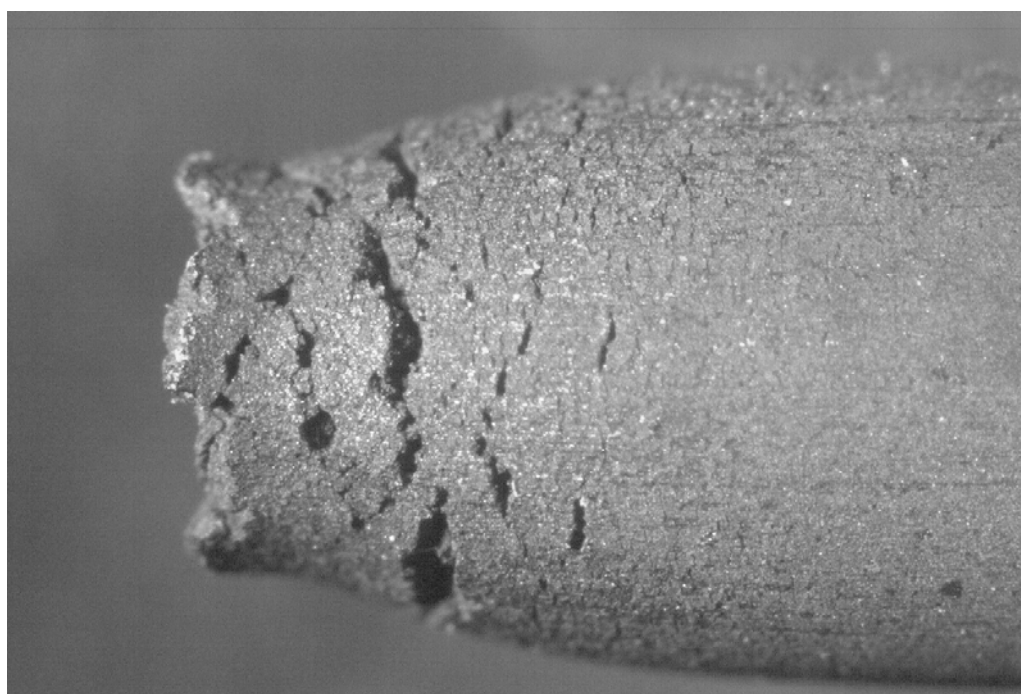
D5-1000-WQ-475 showing severe cracking on the surface
